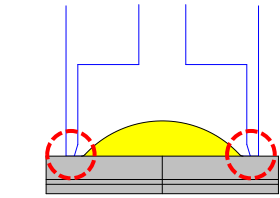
Cross-sectional view of a nozzle when transporting a NICHIA 149 Series LED to a PCB
